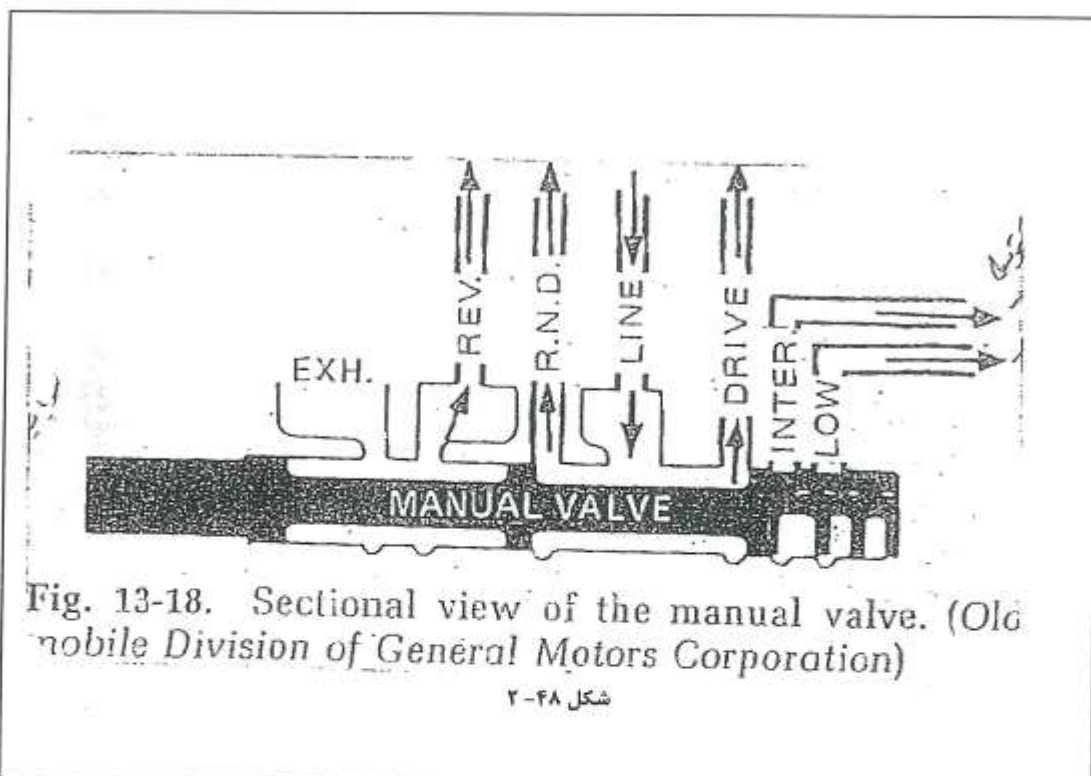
Sectional view of the manual valve. (Old mobile Division of General Motors Corporation)
